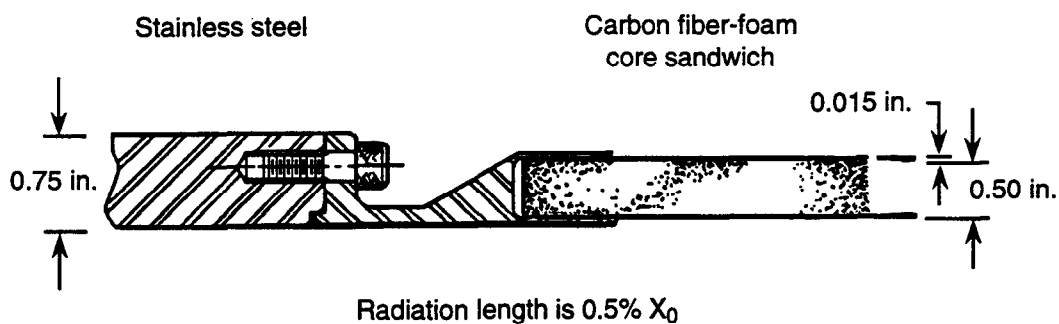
Detail of joint between the thin inner section of the support barrel and the outer stainless-steel section.
